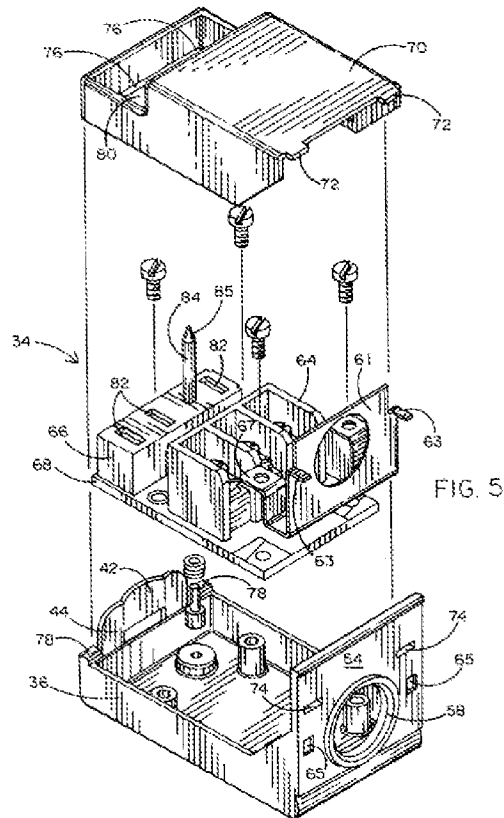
depicts an exploded view of an AC connector module (col. 2, ll. 4-5).
